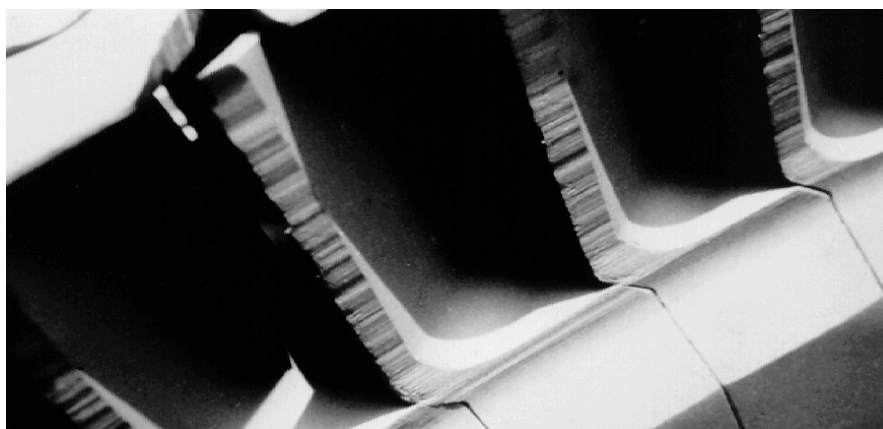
The turbine rotor moved axially upstream, causing the rotating blades to rub against the stationary blades of this row (Edge-on view of the rotating blades with rub marks along the edge.)
